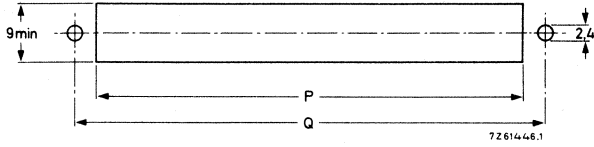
Hole pattern for panel mounting of male parts; see Table 4 for dimensions P and Q.
